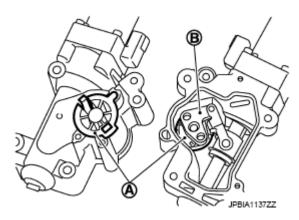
Identifying VVEL Actuator Arm And Holding Jig Courtesy of NISSAN MOTOR CO., U.S.A.
